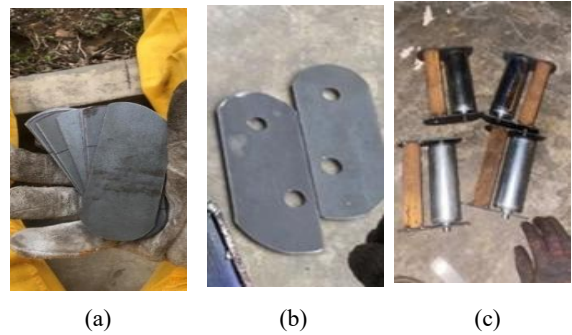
Fabrication inner body steps (a) by cutting the steel, (b) drill the shape and (c) join with roller
